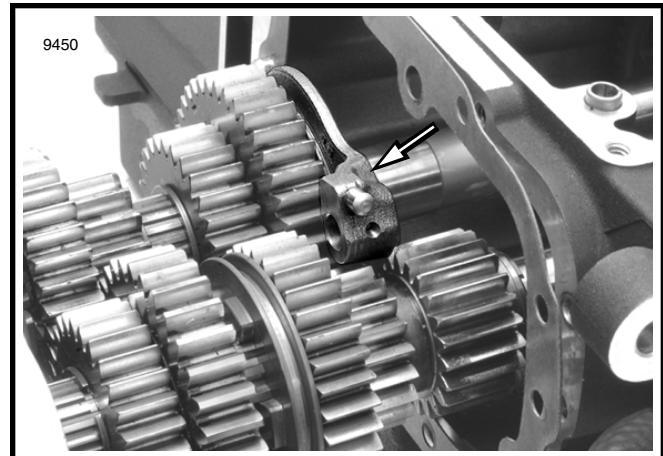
Install 5-6 Shifter Fork Onto Shift Ring
